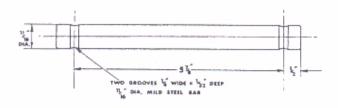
Sketch of wheel spindle tool for use with service tool Z103
